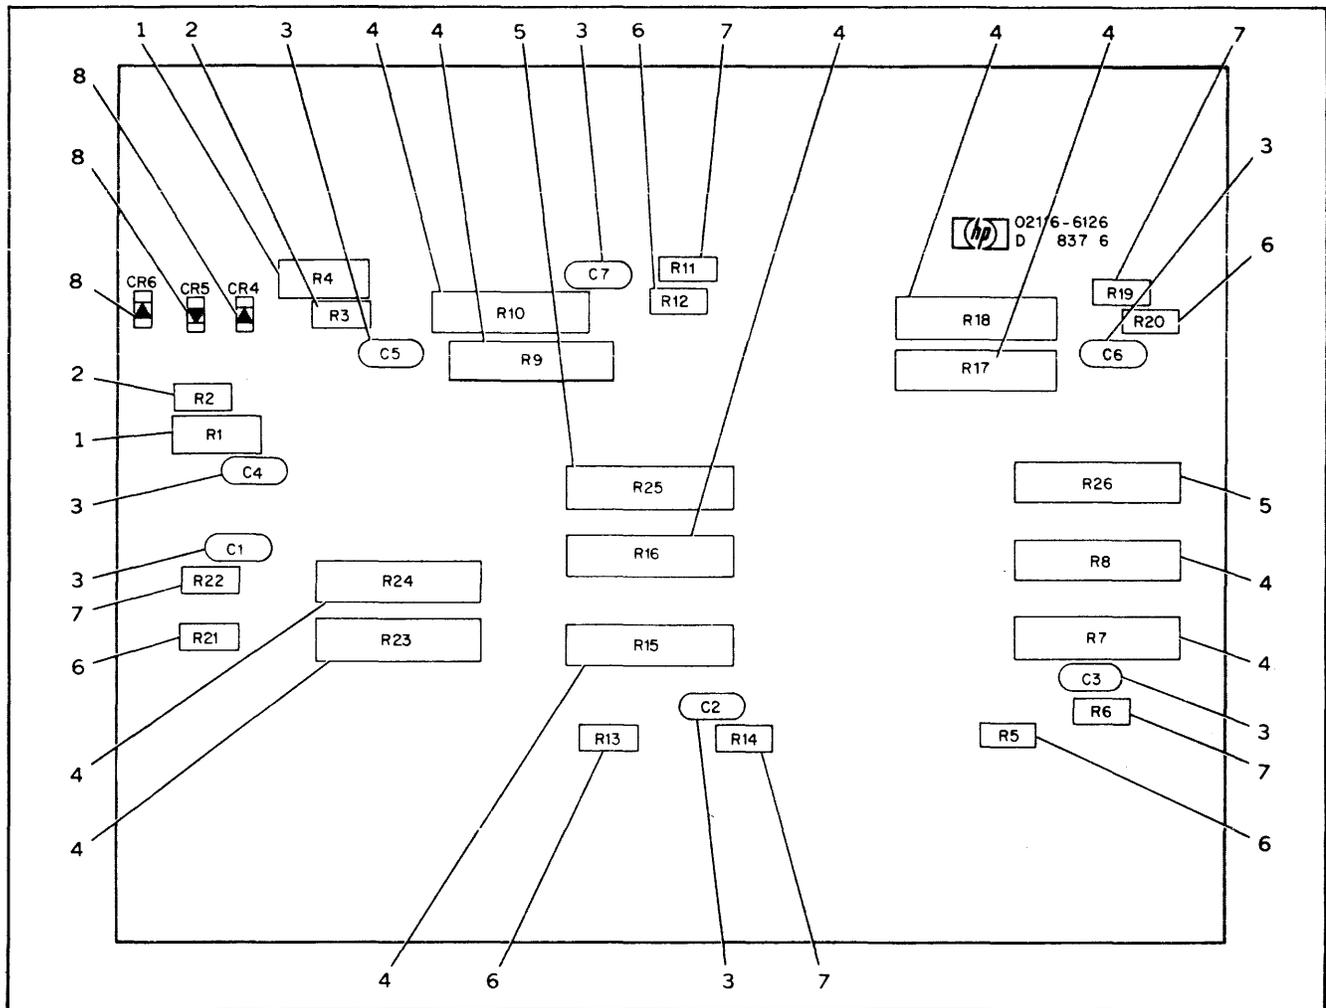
A121 Overvoltage Protection Assembly (02116-6284), Exploded View
